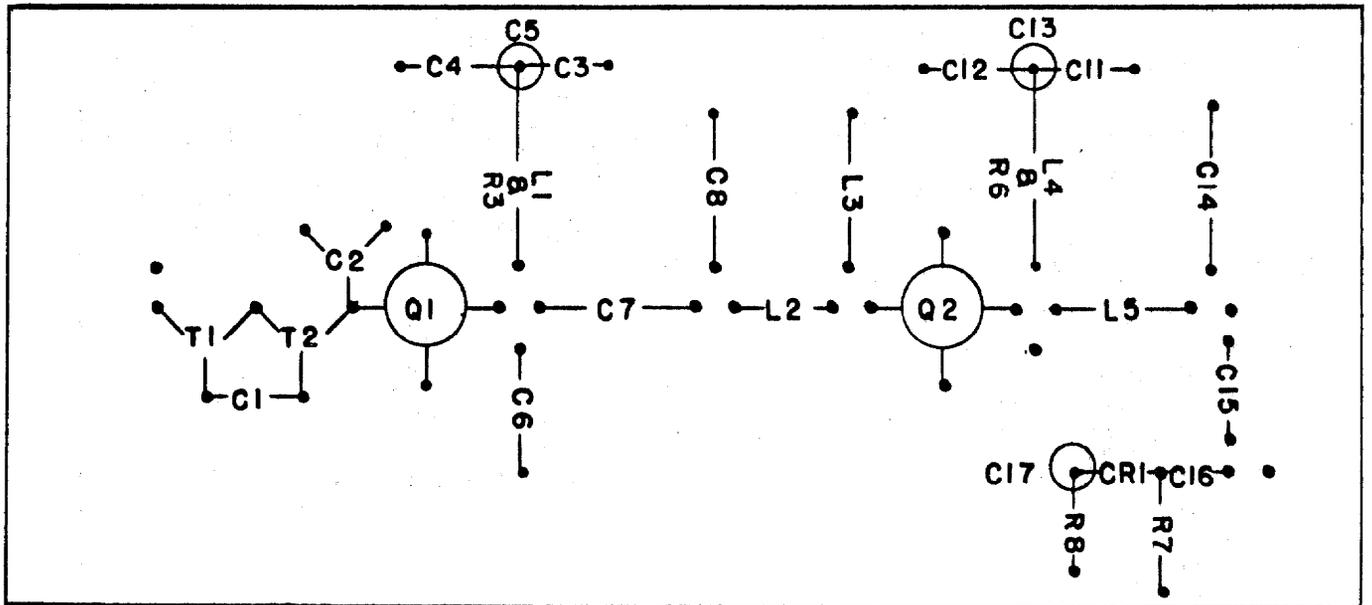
FM-15QE Exciter Bottom View with Cover Removed.
